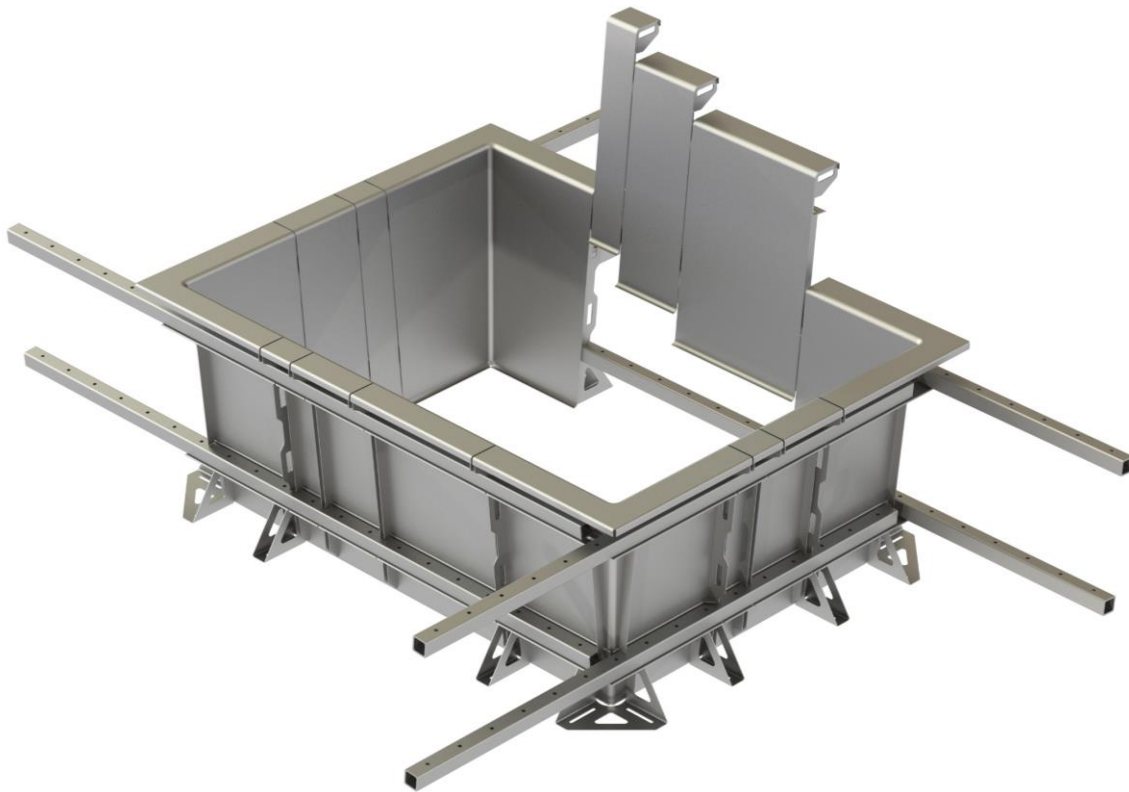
The Adjustable Mold with Insert Panel Assembly's being placed.
